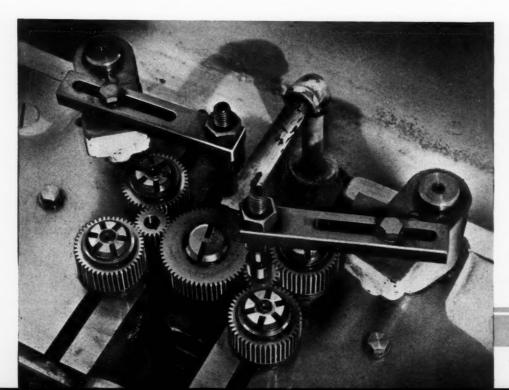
All of the Pump Gears are Burnished for a Predetermined Length of Time, Depending on Work Hardness Desired on Gear Teeth
